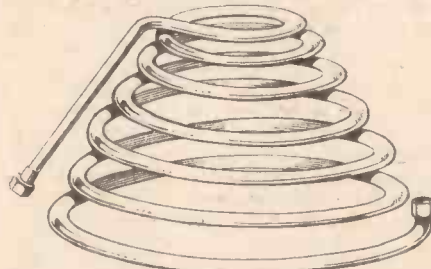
Clarkson boiler, made up of sections, with few joints, which are easily replaced.
